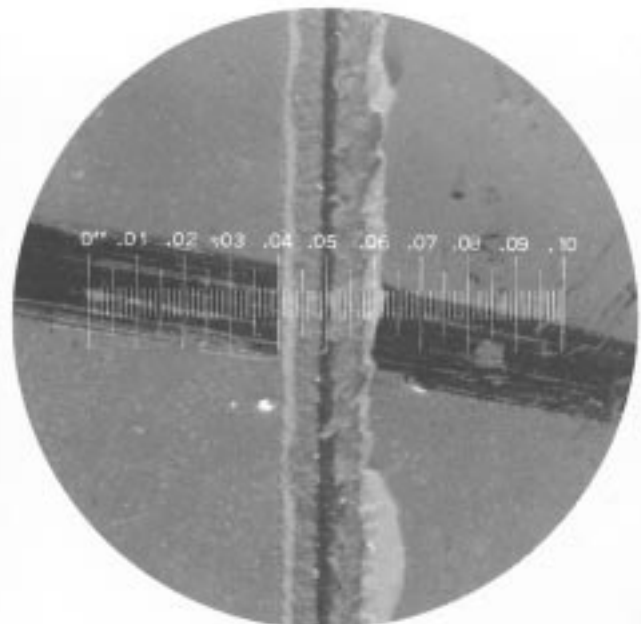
Typical View Through Microscope of Tooke Inspector Gage Showing Reticle
